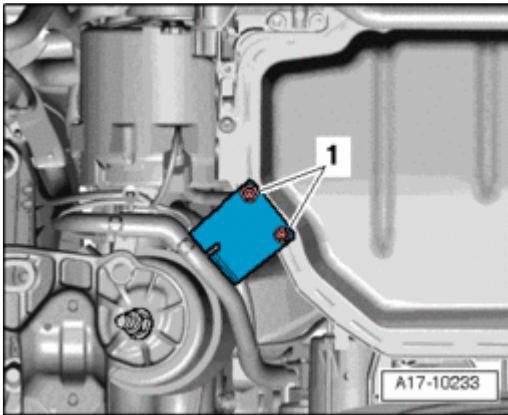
Removing Nuts And Laying Aside Bracket With Electrical Wiring
